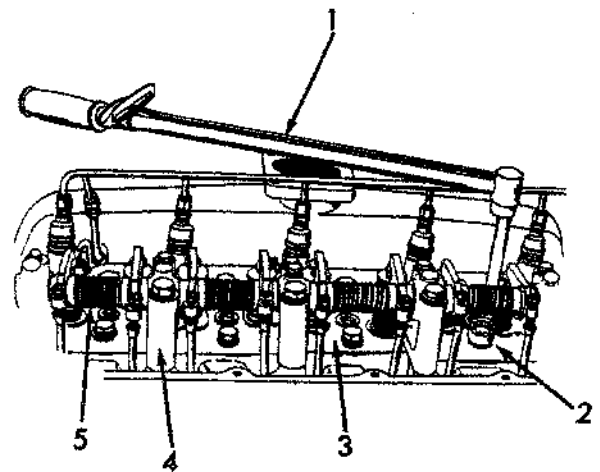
Torquing Cylinder Head Capscrews (T-51265)
